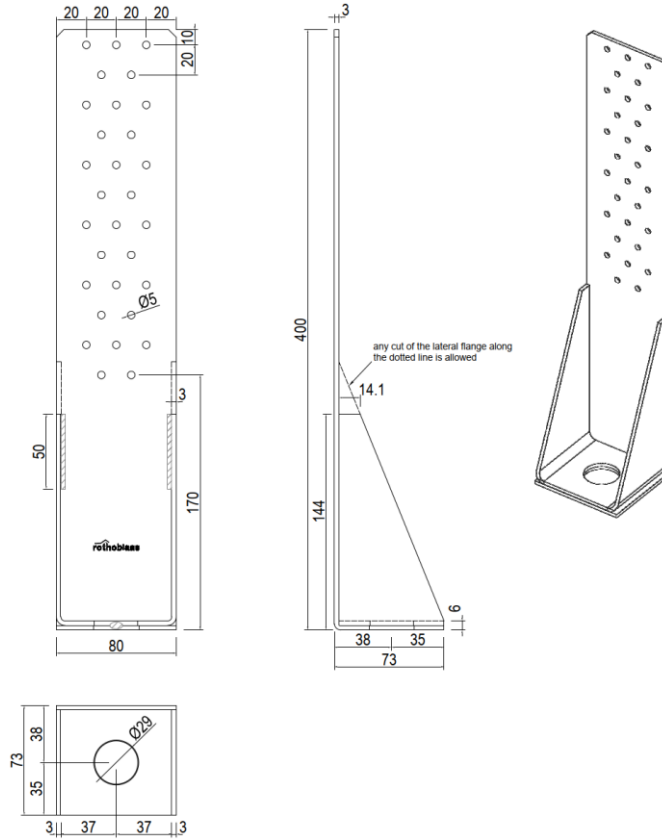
Dimensions of Rotho Blaas WHT30 hold down.
